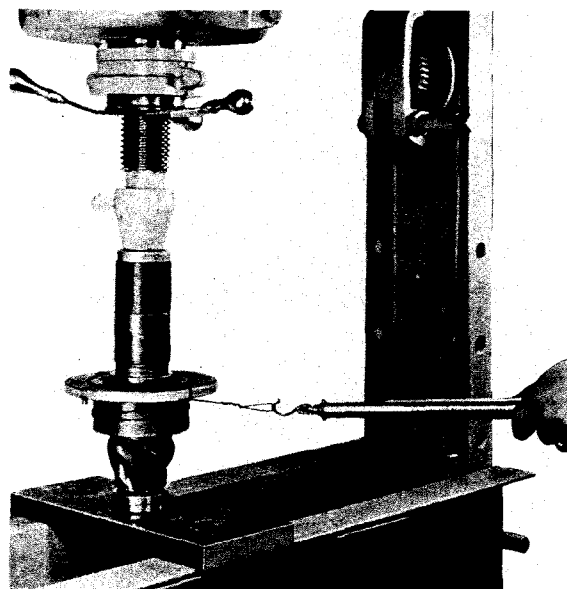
Checking Drive Pinion Bearing Preload with a Spring Scale (pinion in press).
